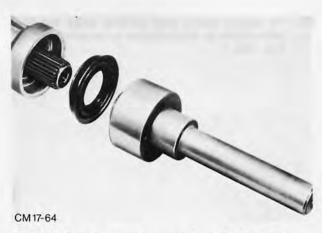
Press in a new extension housing oil seal using Tool 17–002
